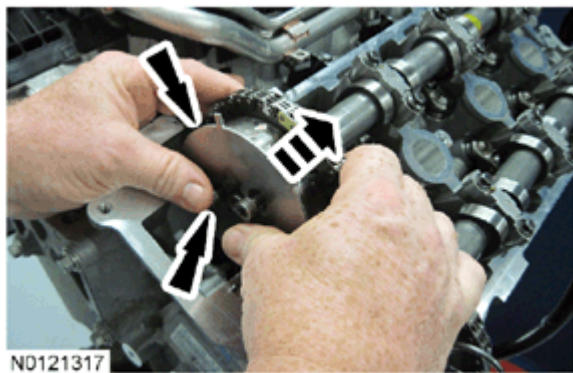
Pressing LH Camshaft Phaser And Sprocket Bolts Towards Rear Of Engine
